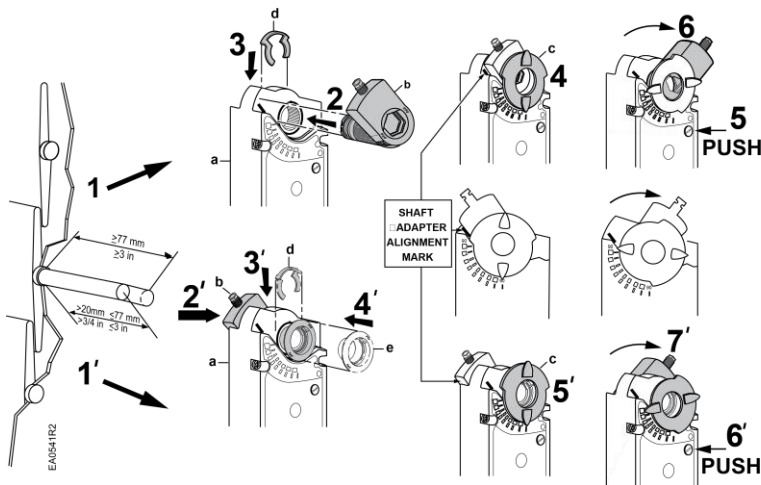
Shaft Adapter Placement for Counterclockwise Rotation on Short and Long Shafts.
